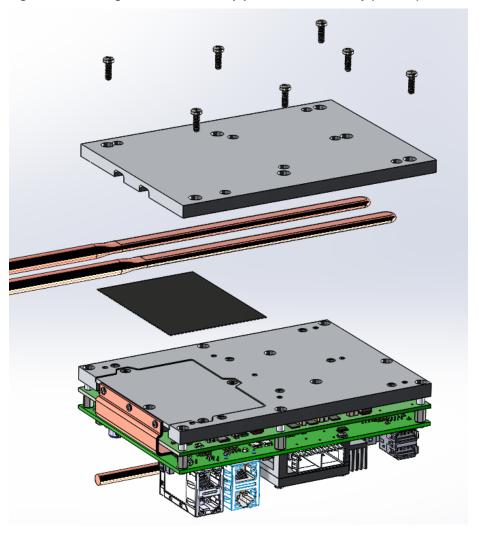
Installing the HDW-422 Heat-pipe Thermal Assembly (Bottom)
